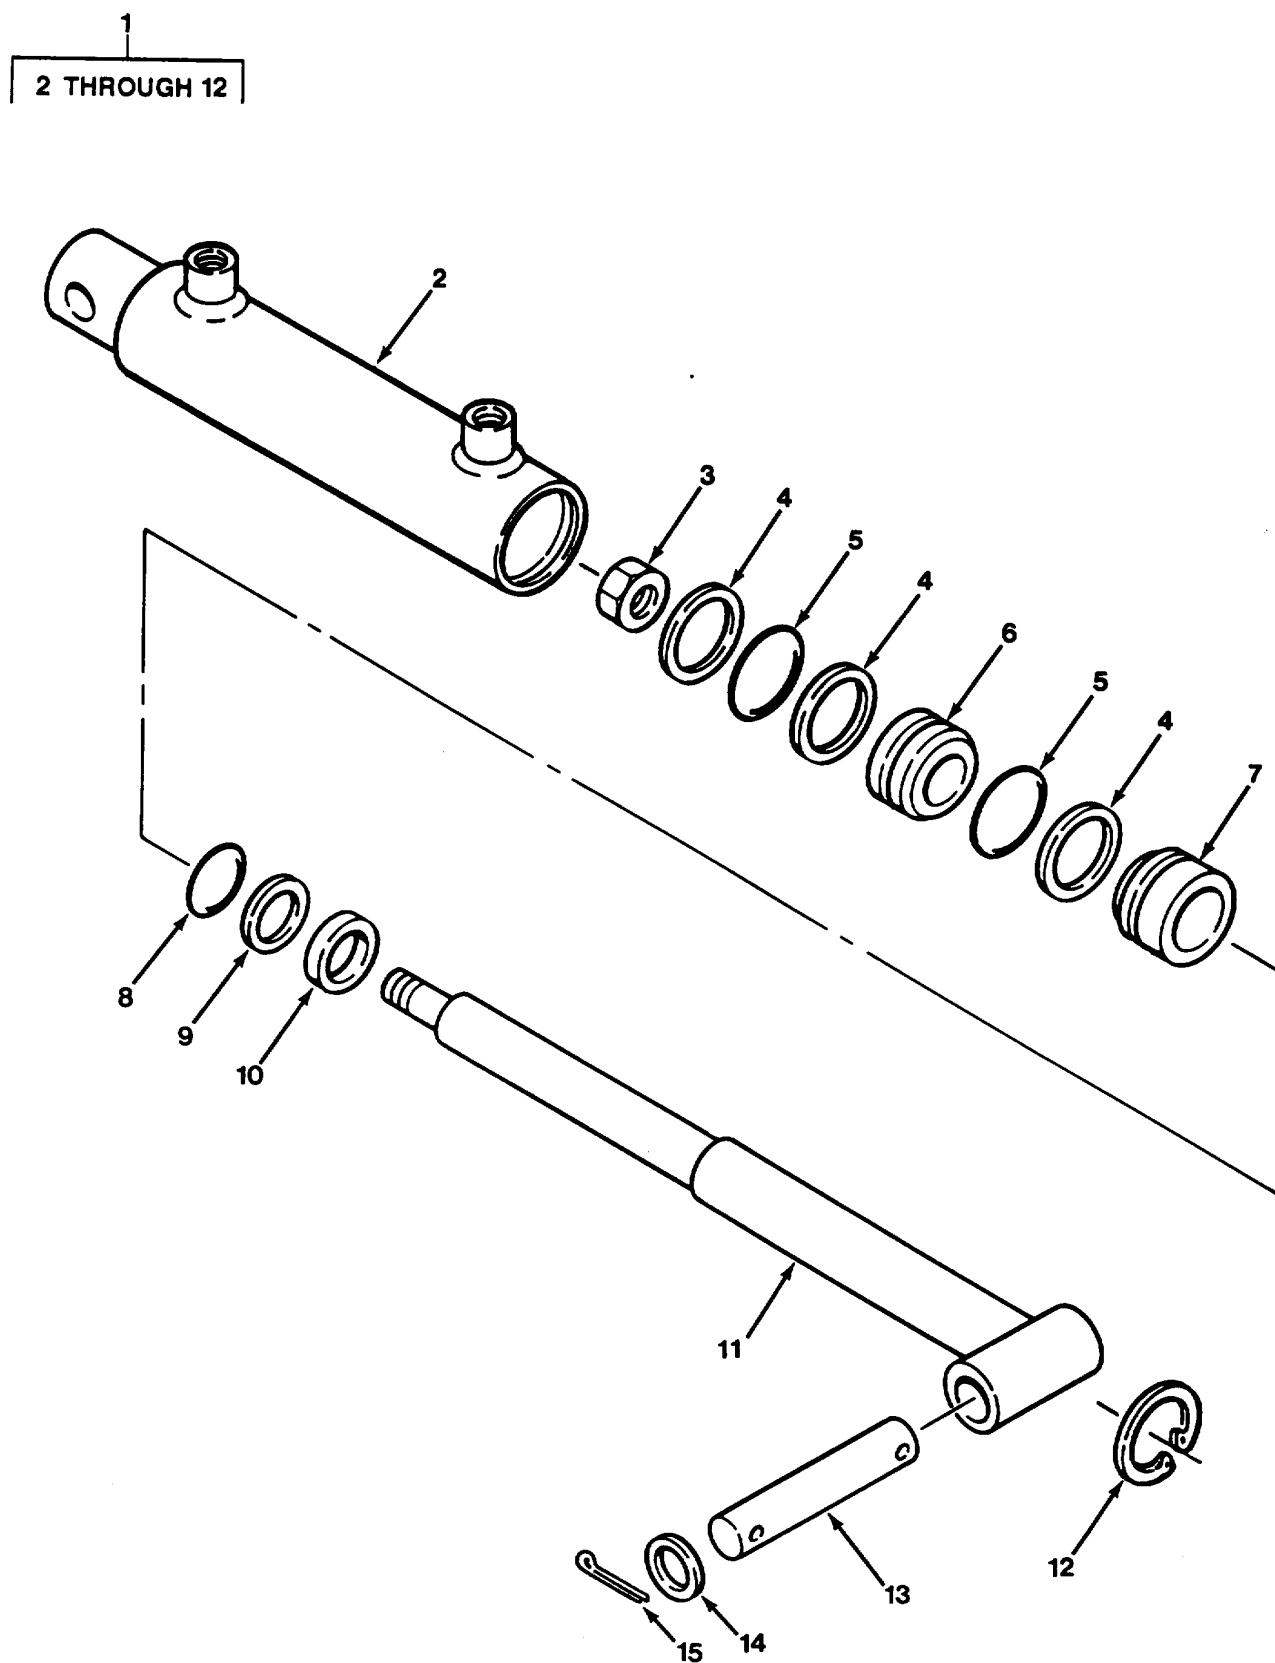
HYDRAULIC LIFT CYLINDER ASSEMBLY
